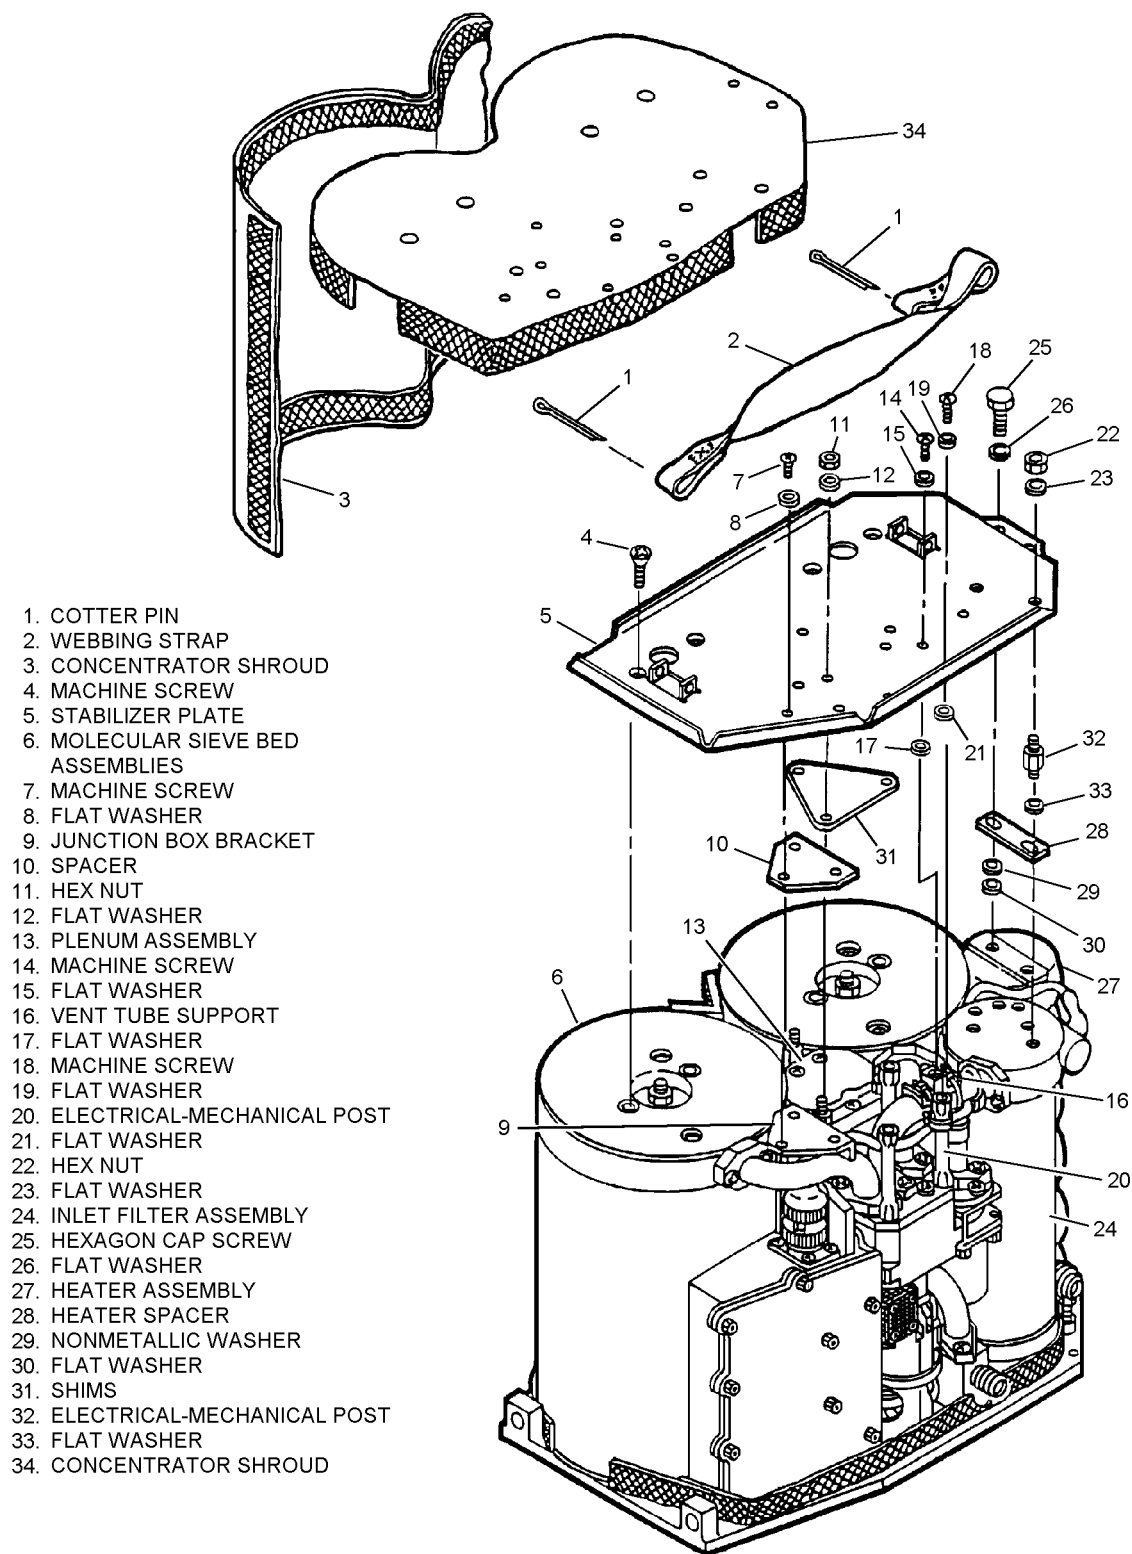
Shroud Assembly/Stabilizer Plate Removal/Installation
